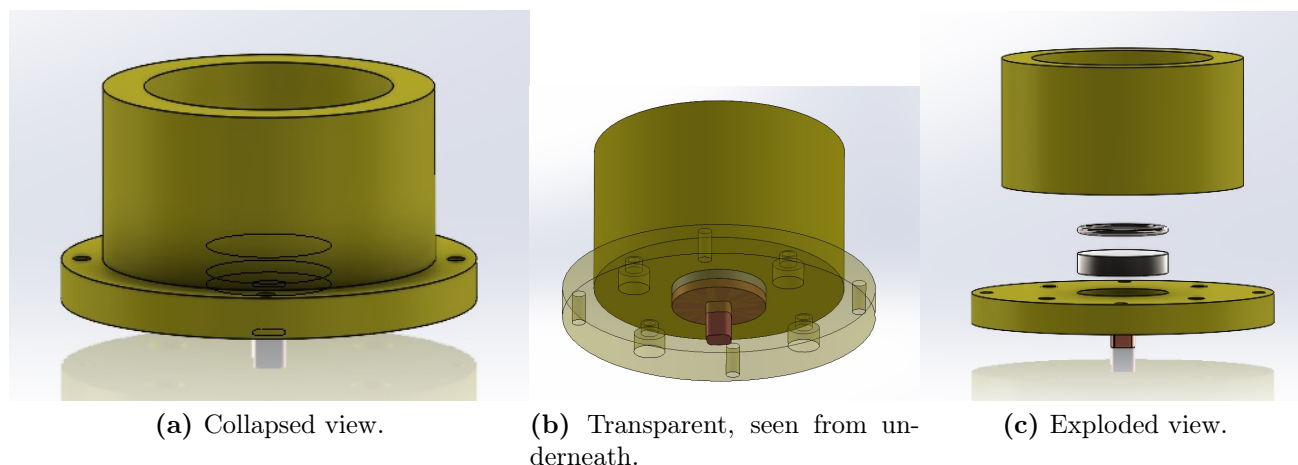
Tribocorrosion sample holder, rotational tribometer.
